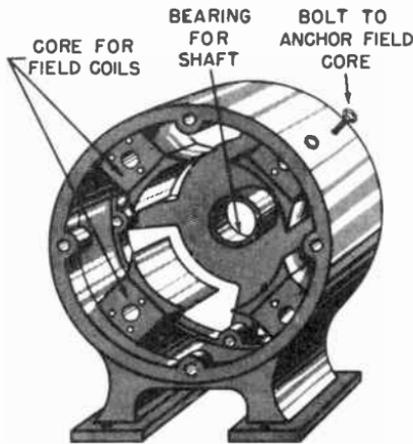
The end bells and field cores are mounted on the frame. The bearings in the end bells receive the shaft on which the armature rotates.
